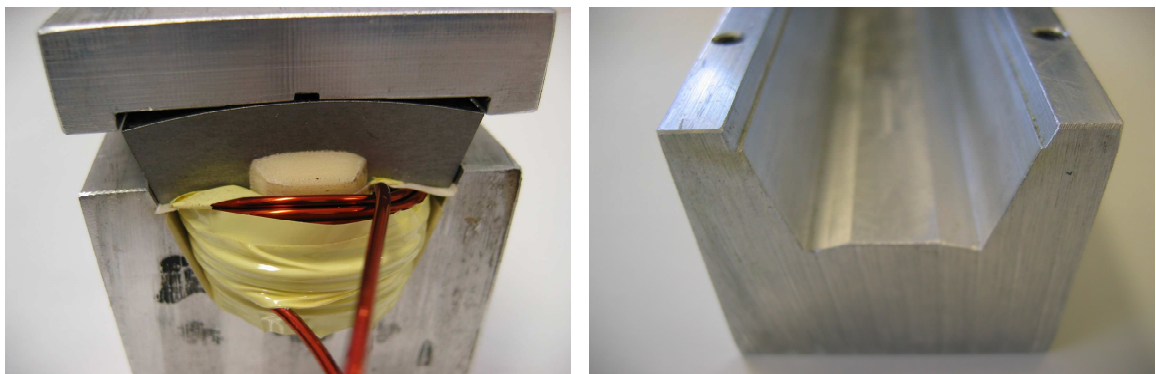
Jig used to press the bulging windings and make them ready for bonding
